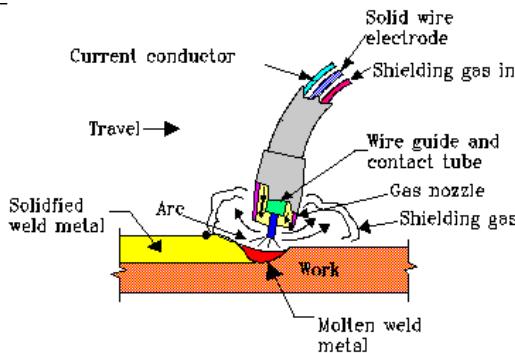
Metal Inert Gas (MIG) Welding
